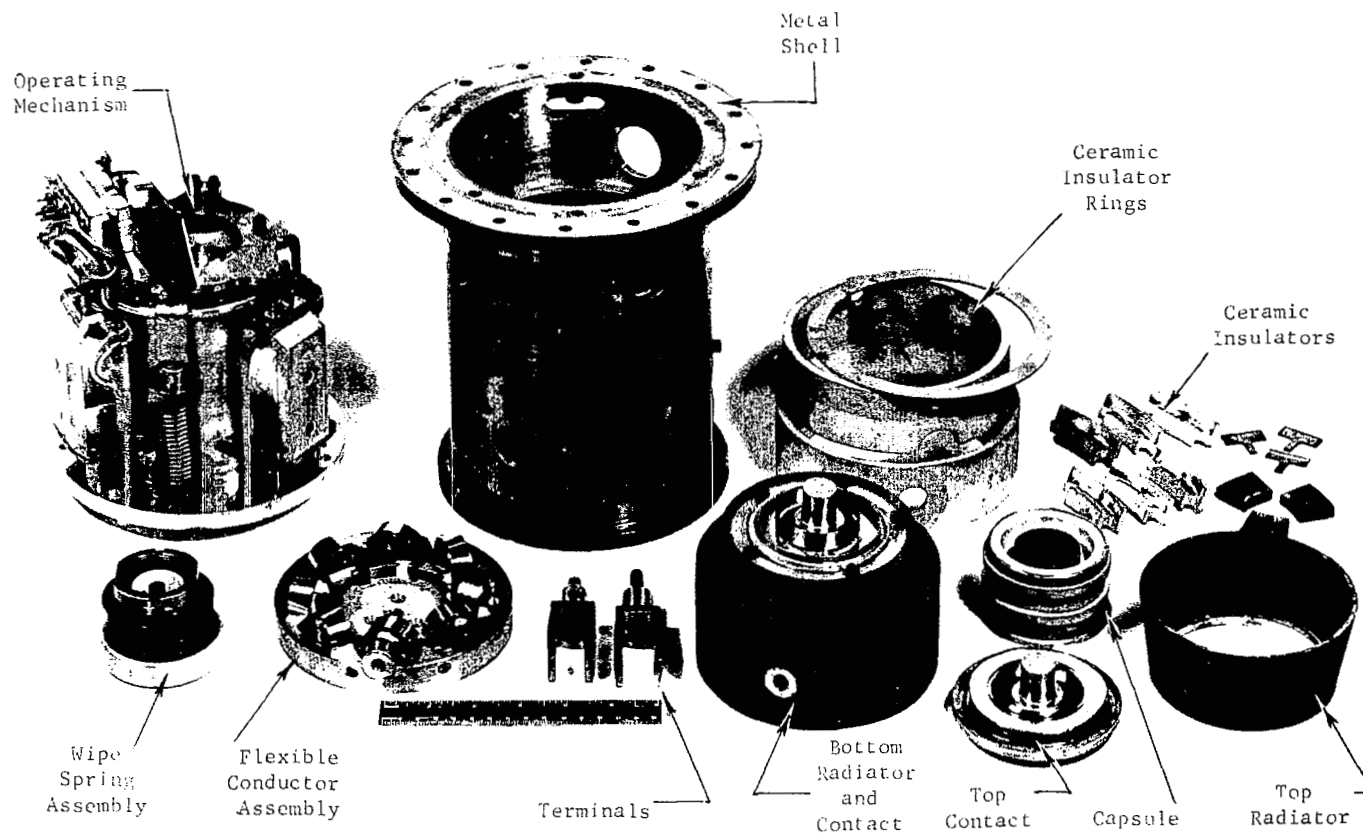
AC Breaker Parts After Dismantling, Following 2700-Hour Endurance, Switching, and Interruption Tests.
